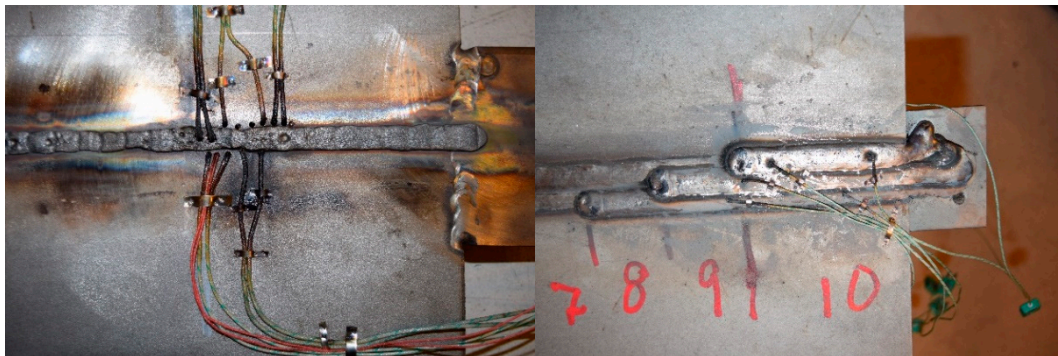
(Left) Back side of the joint showing the layout of the thermocouples inserted through drilled holes. (Right) Front side of the joint showing the layout of the harpooned thermocouples in the last passes. Note that the image shows the harpooned thermocouples only in the last passes because most of them have to be removed prior to welding of the following weld pass.
